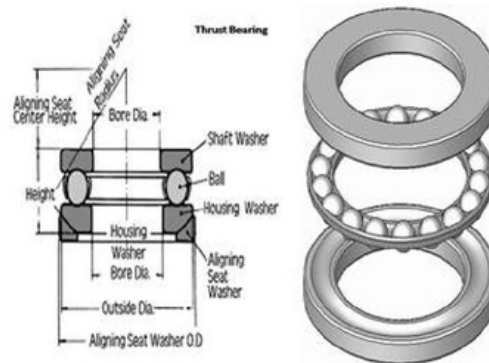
Exploded view of a Thrust Bearing and its inner workings
